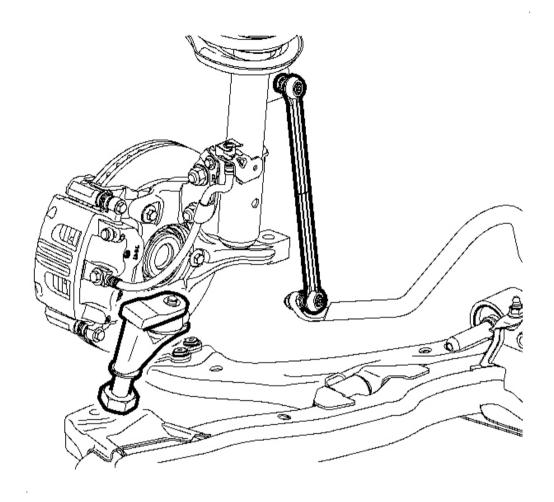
Lower Control Arm, Steering Knuckle & J 43828 Courtesy of GENERAL MOTORS CORP.
